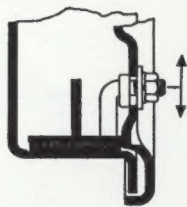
C—If a shoe stop is used it will be at lower end of backing plate as shown above
